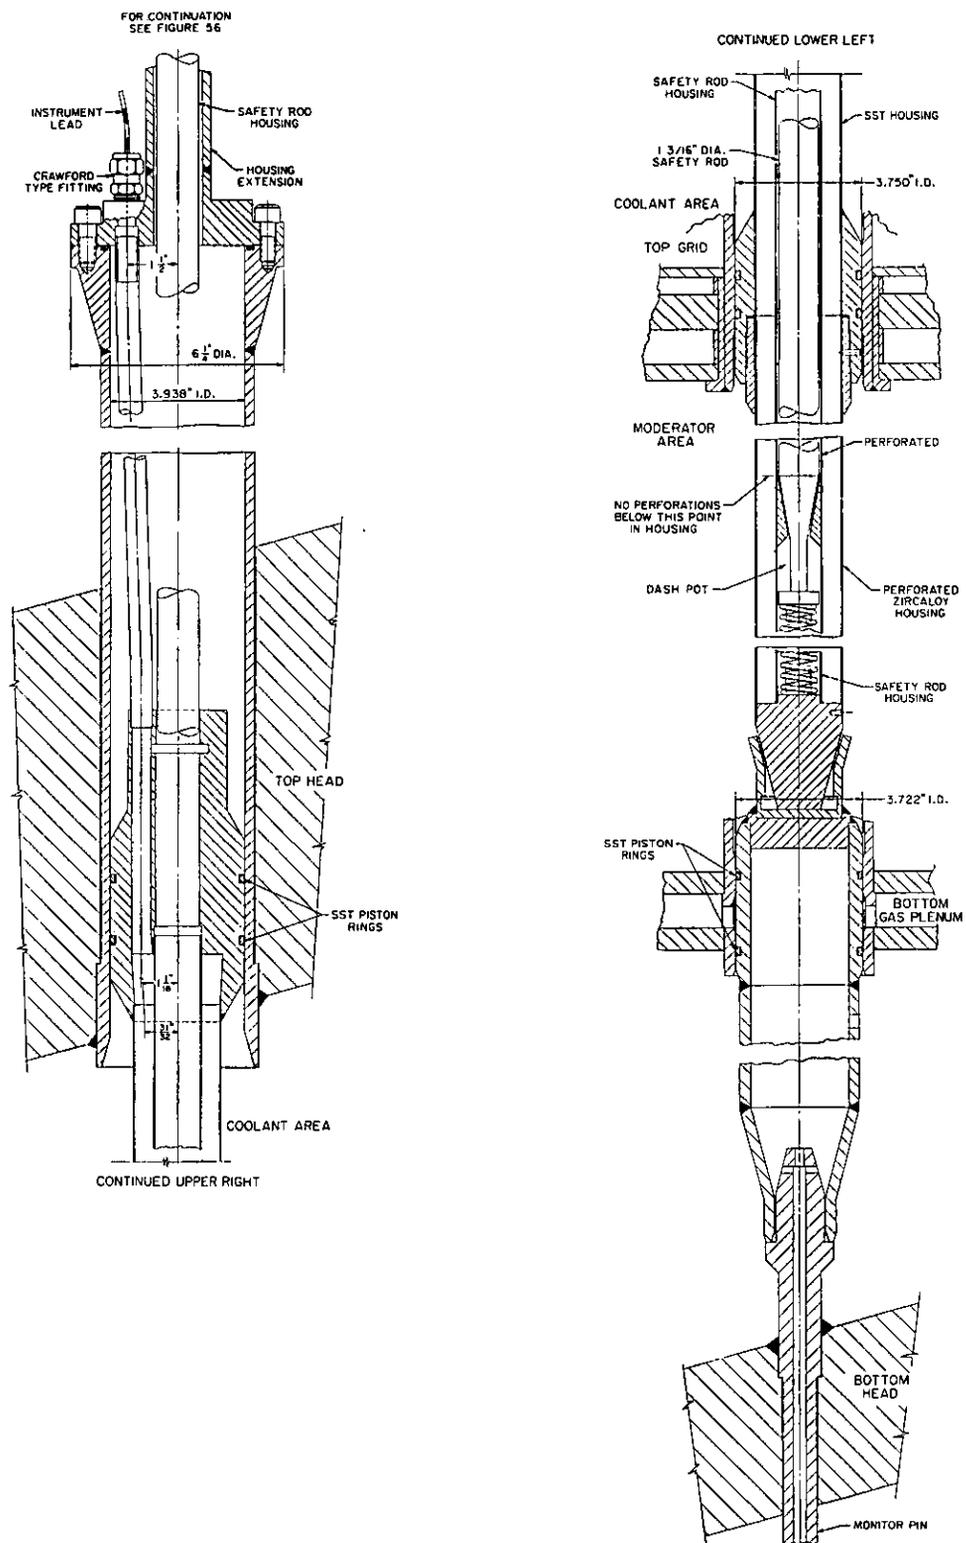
PRESSURE VESSEL REACTOR - SAFETY ROD - TOP DRIVE
